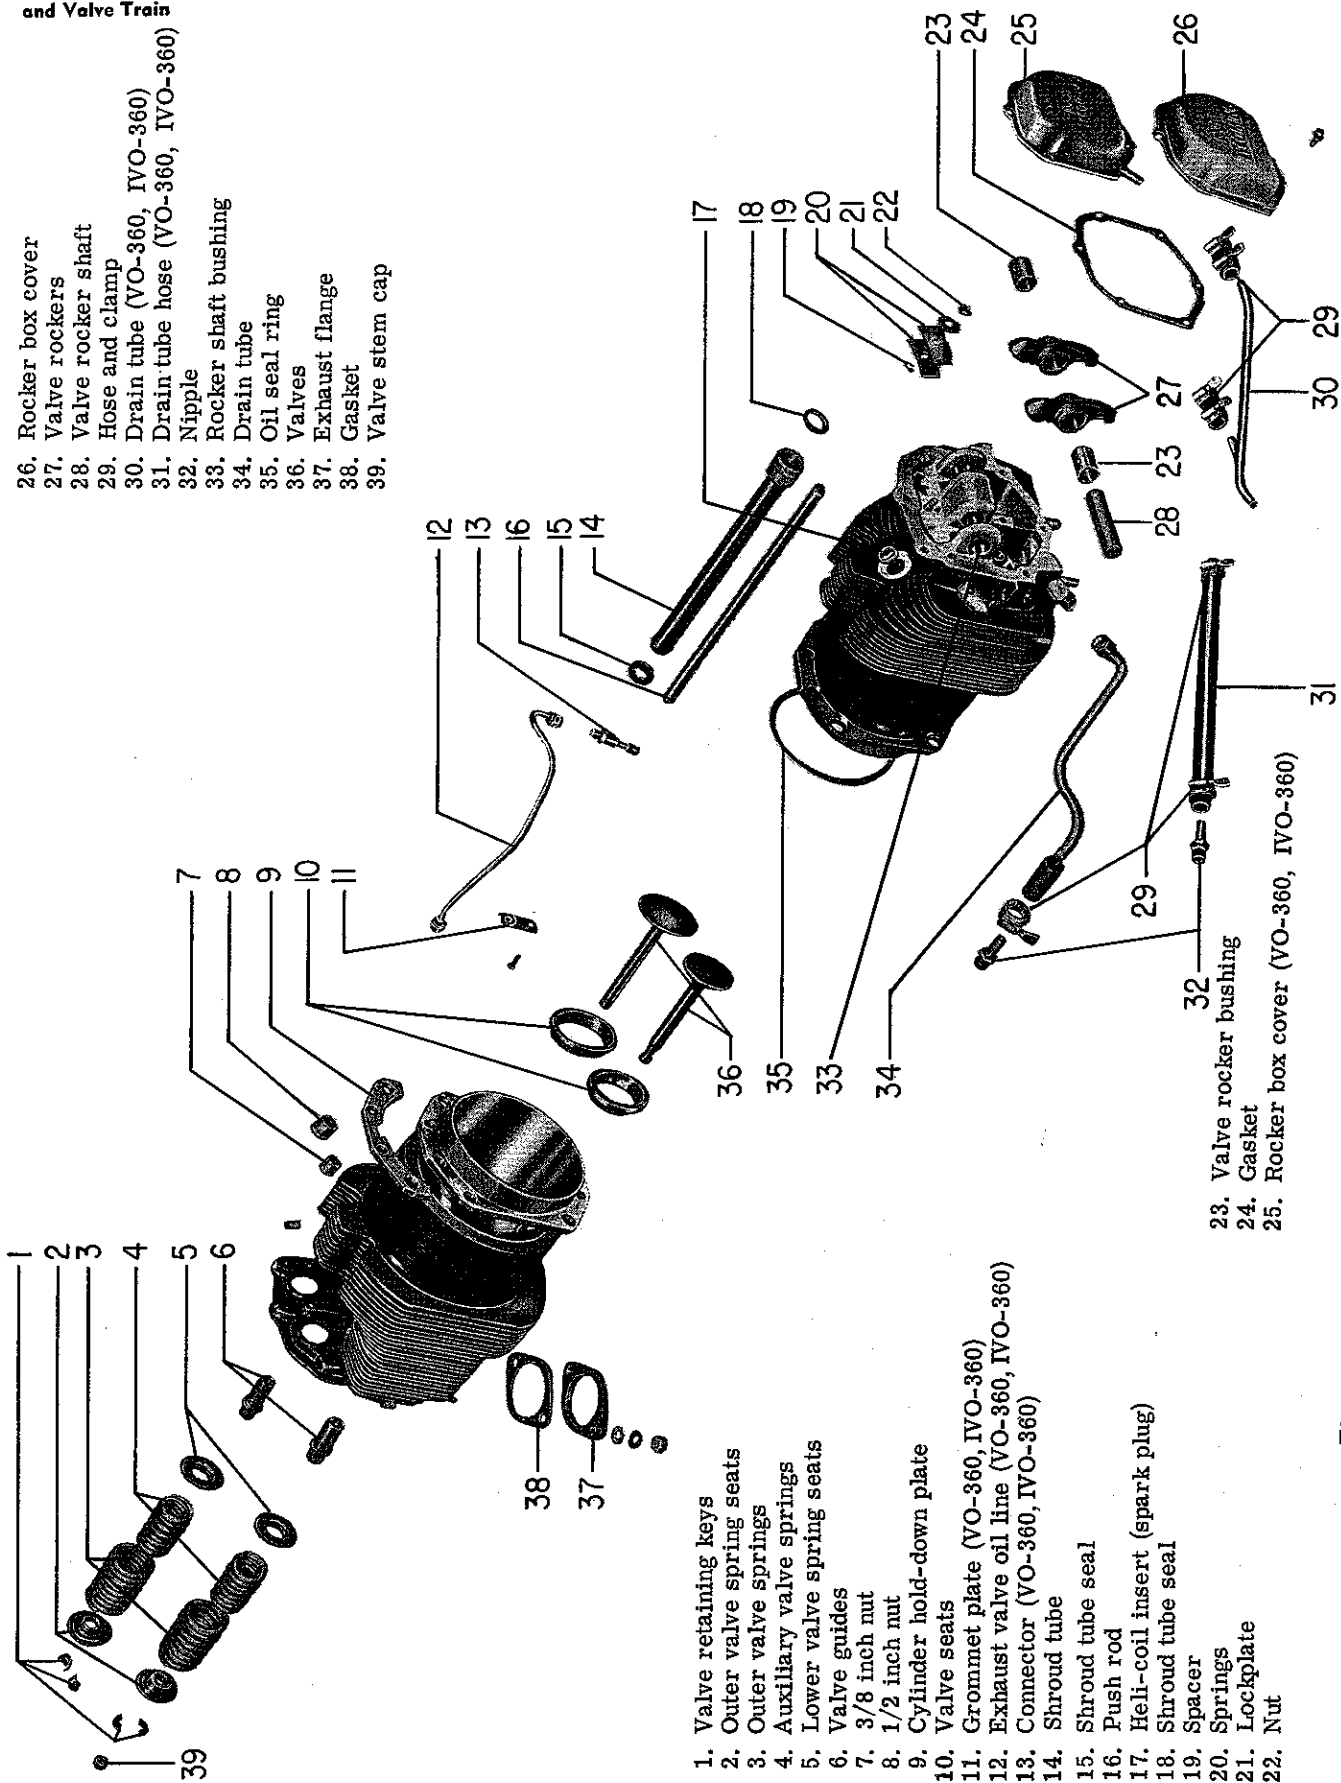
Parallel Valve Cylinder Assembly (Except O-235, O-290-D, O-290-D2)
